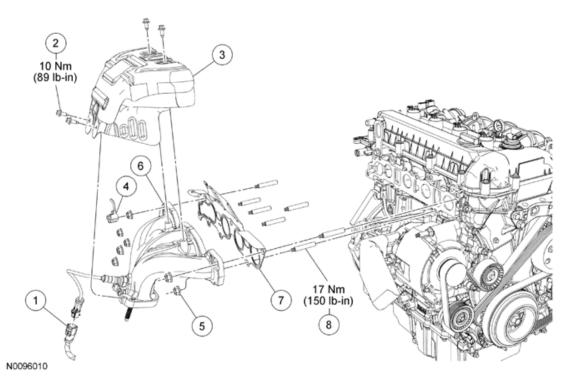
Exploded View Of Exhaust Manifold With Torque Specification Courtesy of FORD MOTOR CO.
